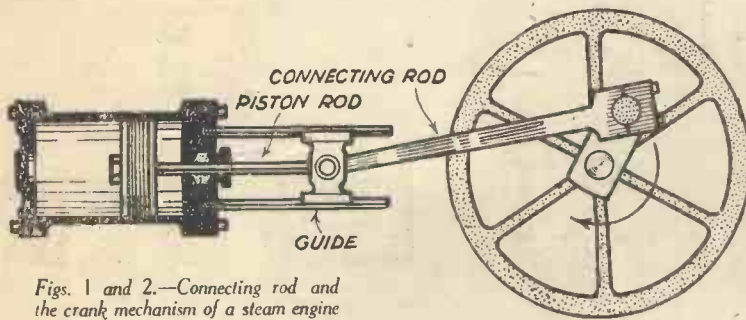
and 2.—Connecting rod and the crank mechanism of a steam engine
